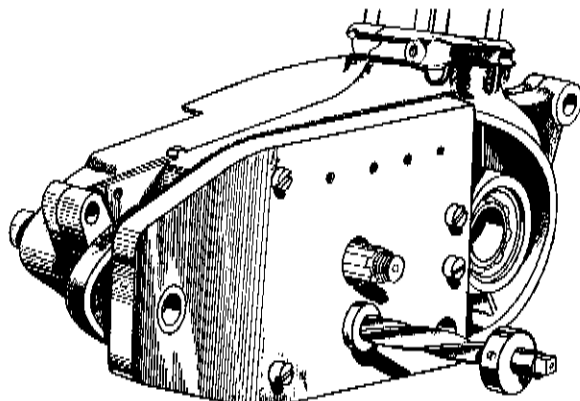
Line Reaming the Gearbox Bushes with Service Tool 61-3199.
